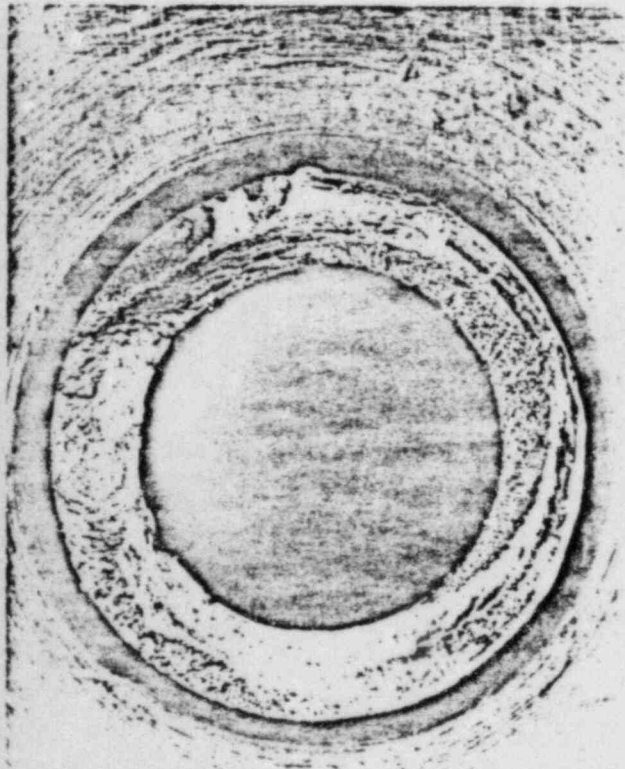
Optical Fractograph of Fracture Surface of Thermowell No. 112CD
